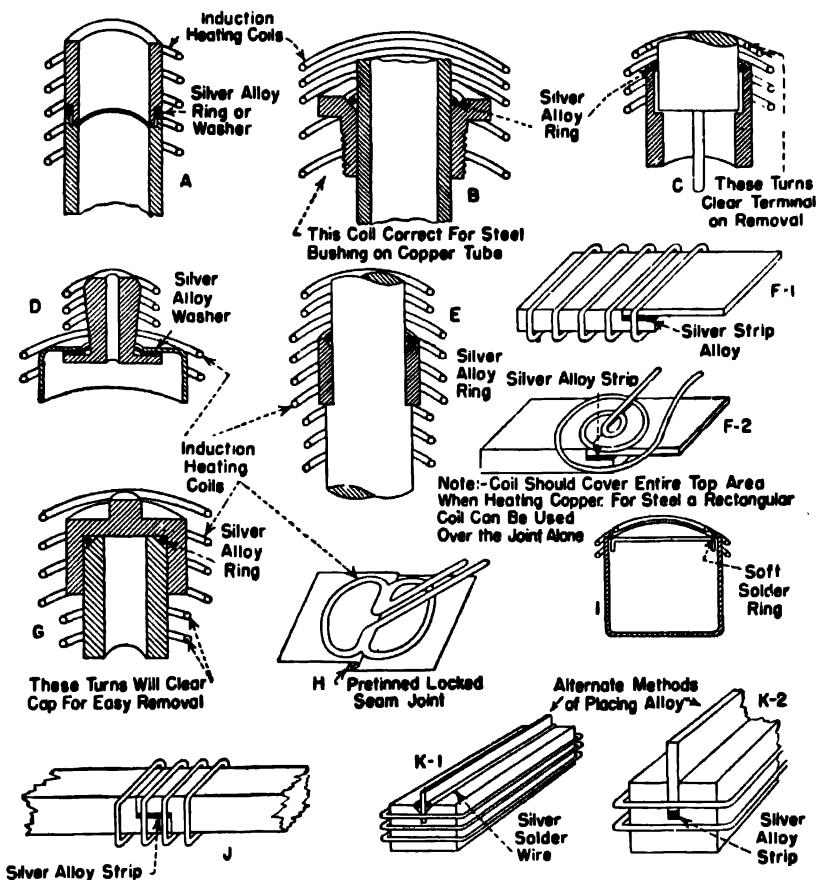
Joints for induction brazing, and the application of the induction heating coils.
